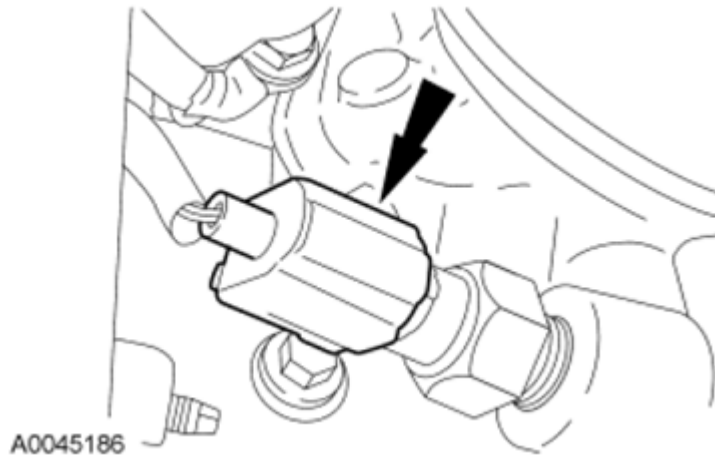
Locating Engine Oil Pressure (EOP) Switch Electrical Connector
